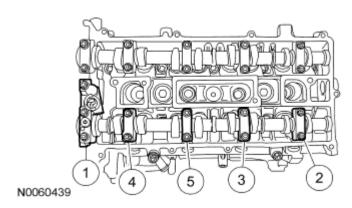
Identifying Intake Camshaft Bearing Cap Bolts Loosening Sequence Courtesy of FORD MOTOR CO.
